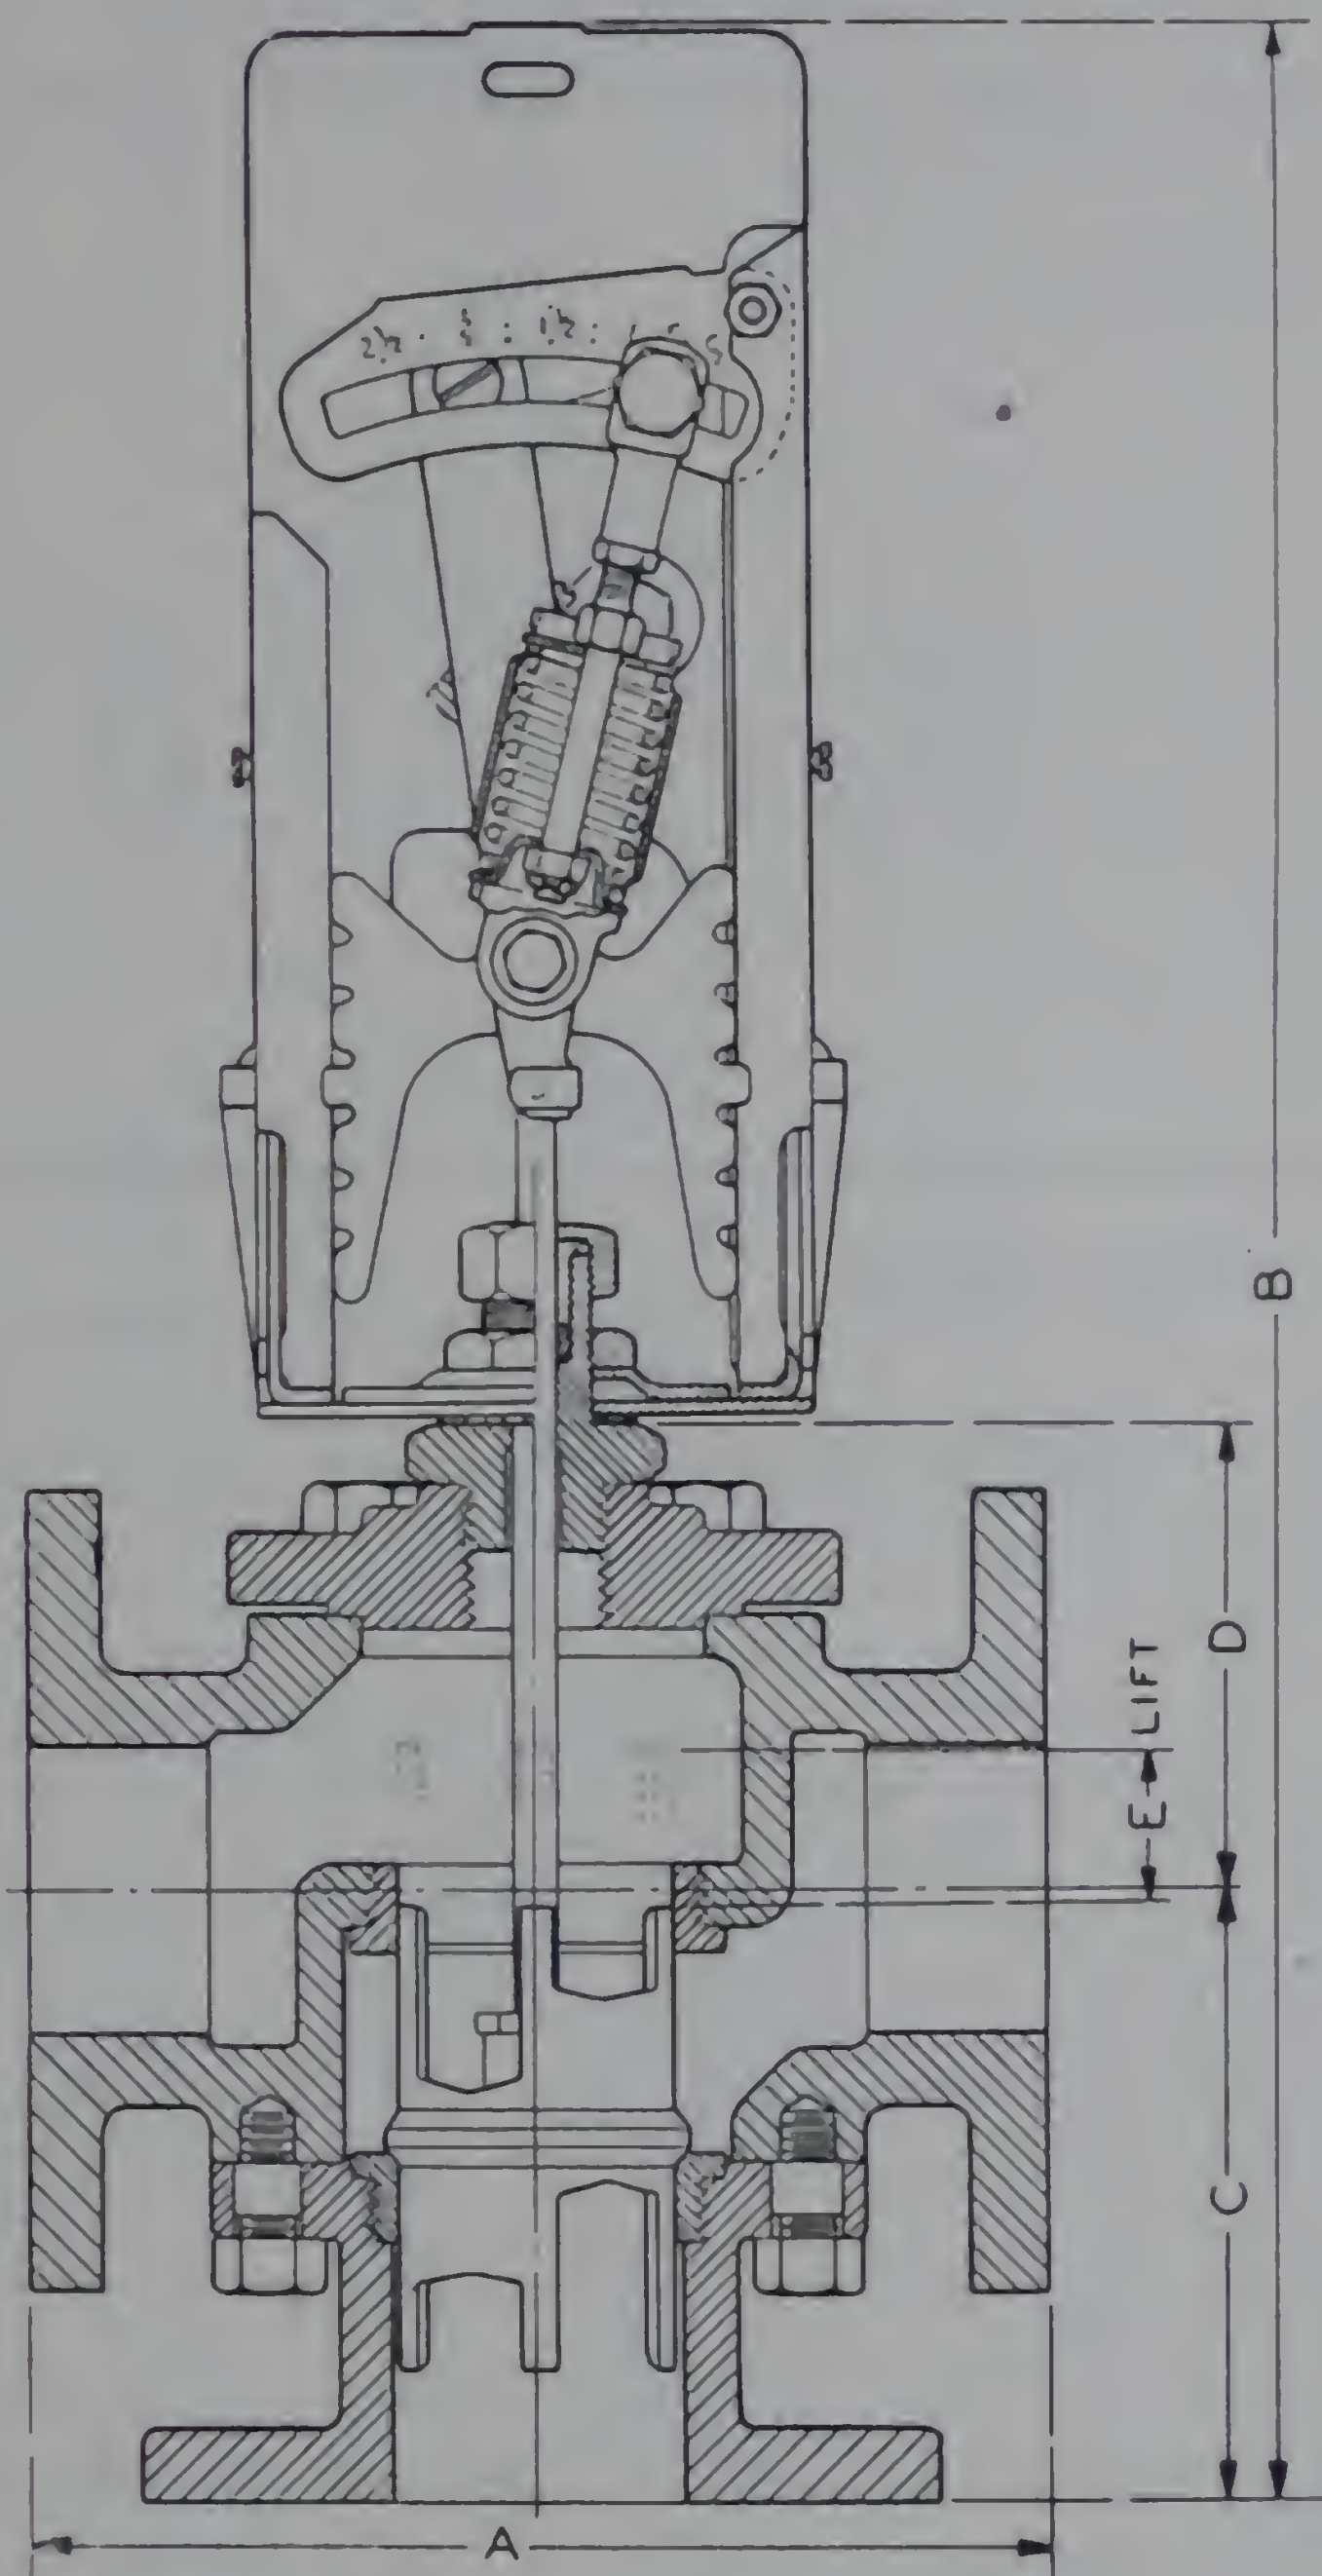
Dimensional drawing of flanged type K903A Motorized Valve
